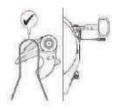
6- Make sure that the locking jaw is fully open for attaching/detaching the semi-trailer pin and the locking lever can be slid inside. (see Figure 11)
